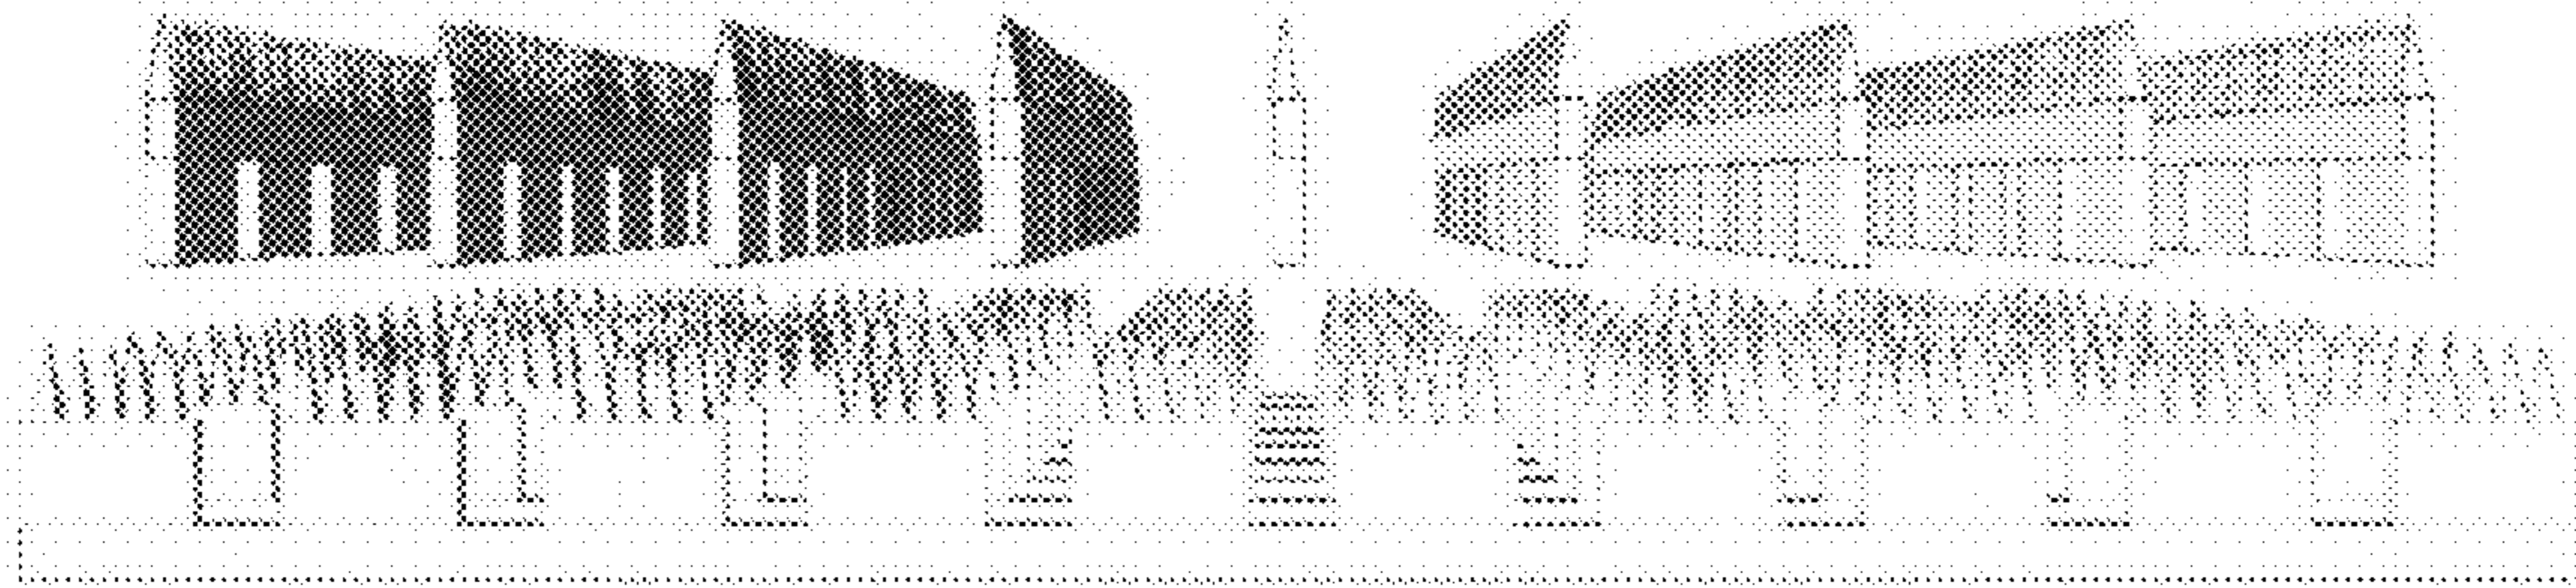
(Front view with the blade sets vertically separated apart for the purpose of teaching)
